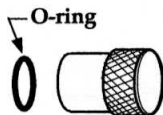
O-ring for Valve Cap "6227-12", "MC-1" Series Only.
